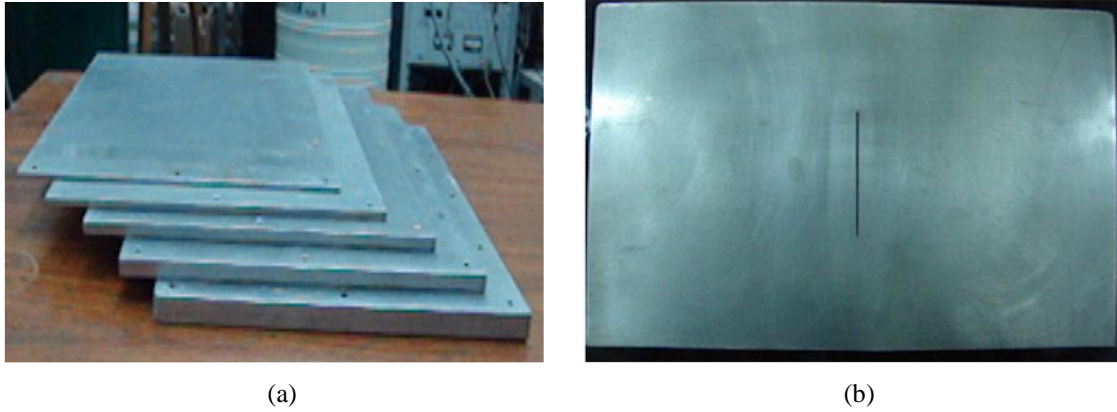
(a) Aluminum plates without defect; (b) 1.5 thick Aluminum plate with defect.
